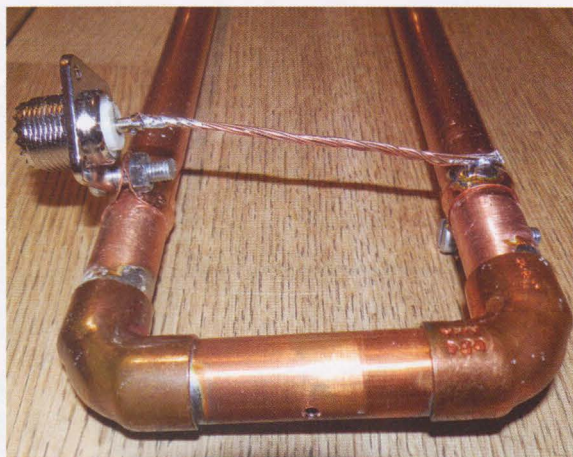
Completed base section and feed. Note the drain hole drilled in the bottom of the spacer.
